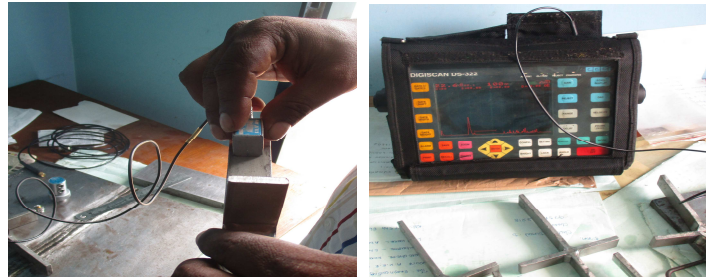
Ultra Sonic Testing of Fabricated Specimens
